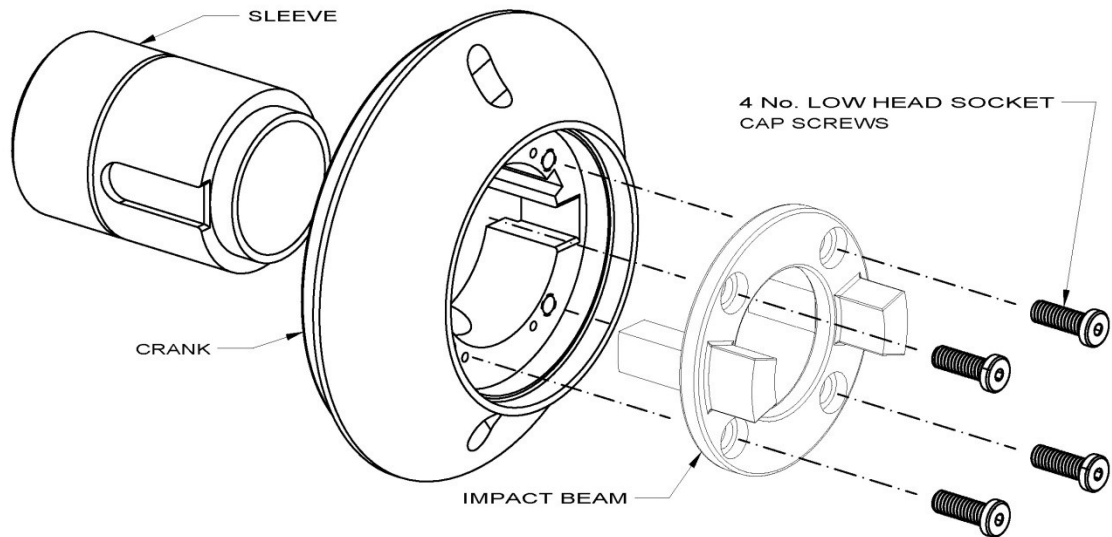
Impact ring assembly with integral keys and screws to fix the ring to the face of rotor.
